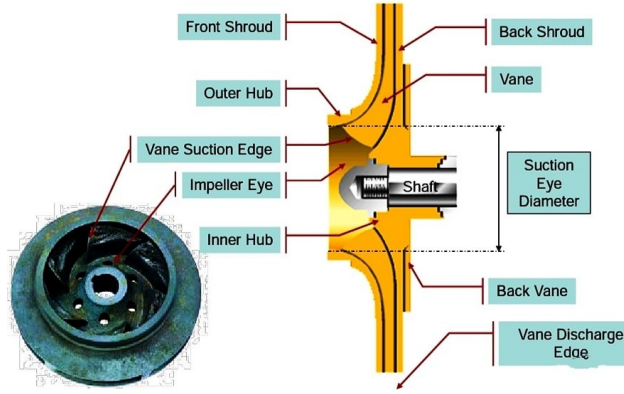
An impeller mounted and fed with a hollow shaft. The shaft rotates with the impeller, such that the impeller isn't moving radially or axially, but is still free tangentially.³
